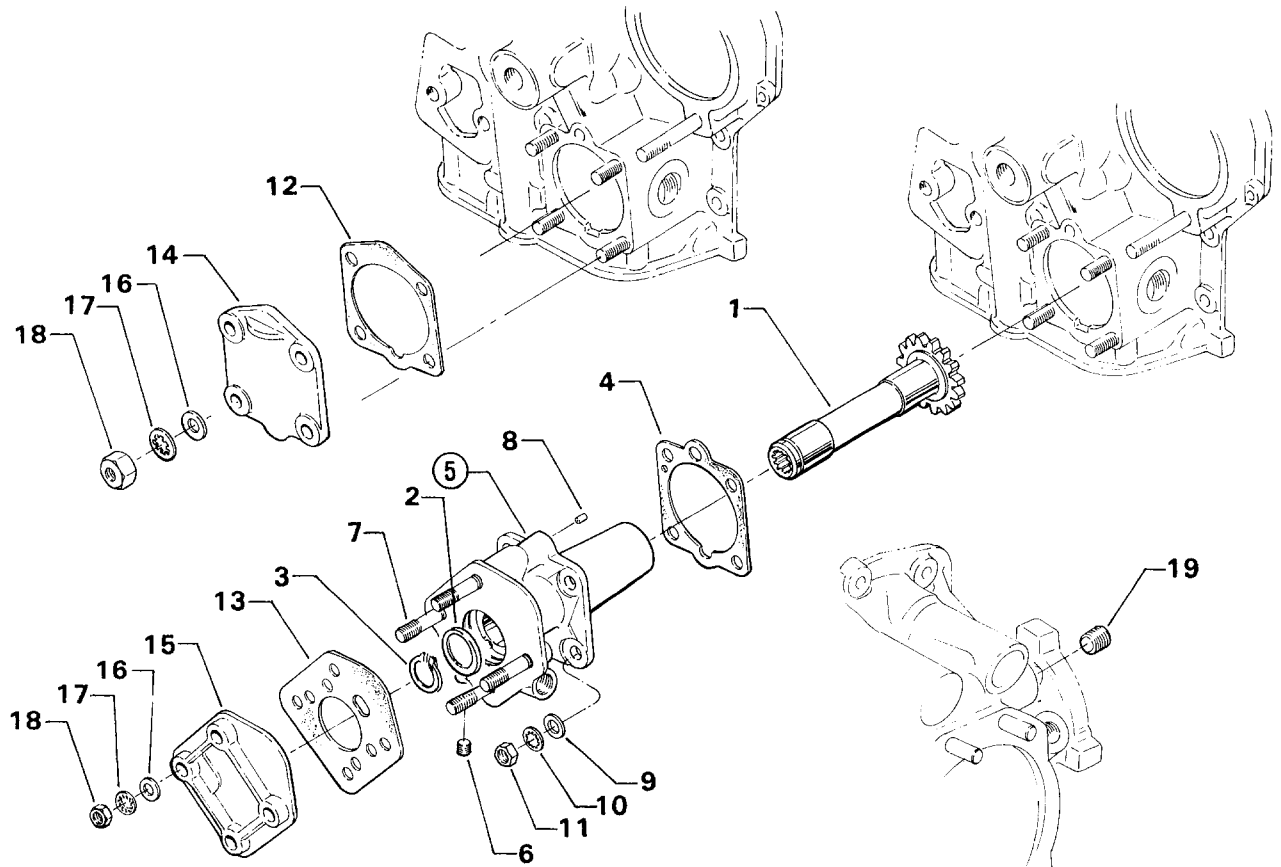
PROPELLER GOVERNOR OIL LINE
